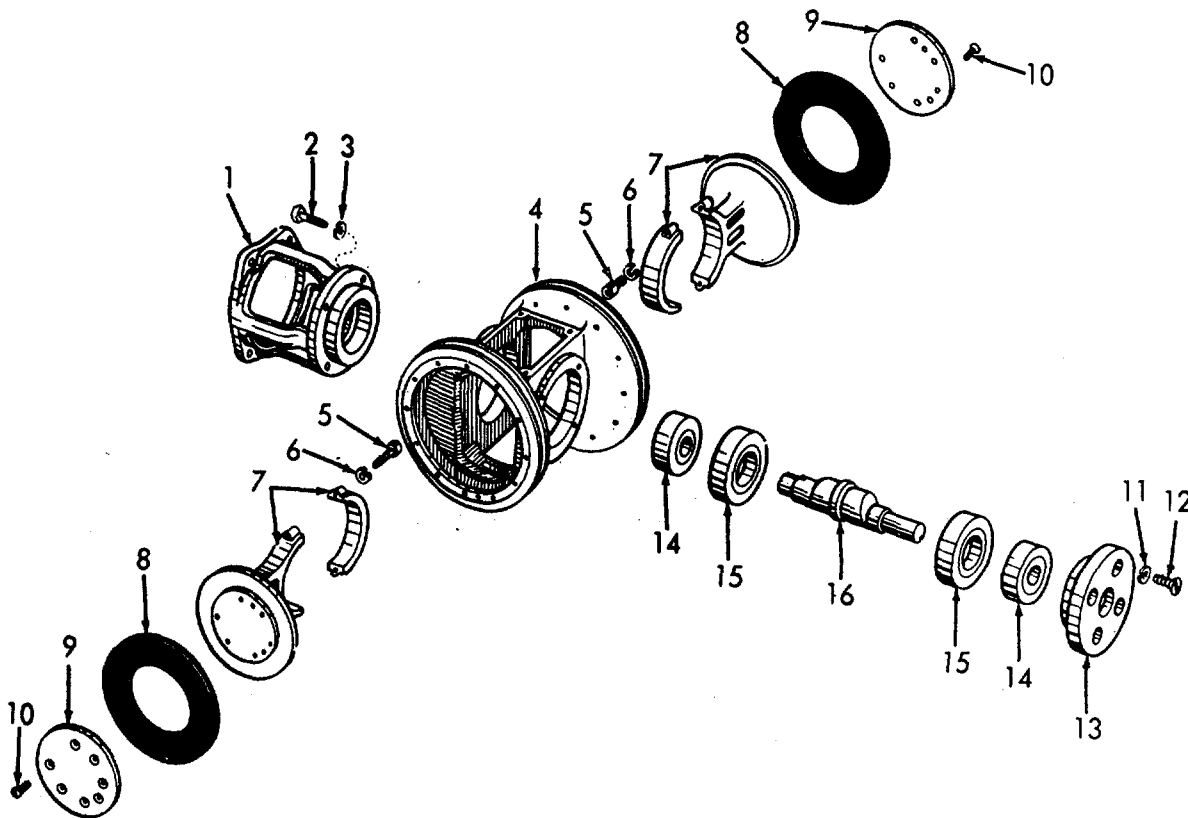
Compressor piston, bearing caps, and bearing plate, removal and installation
